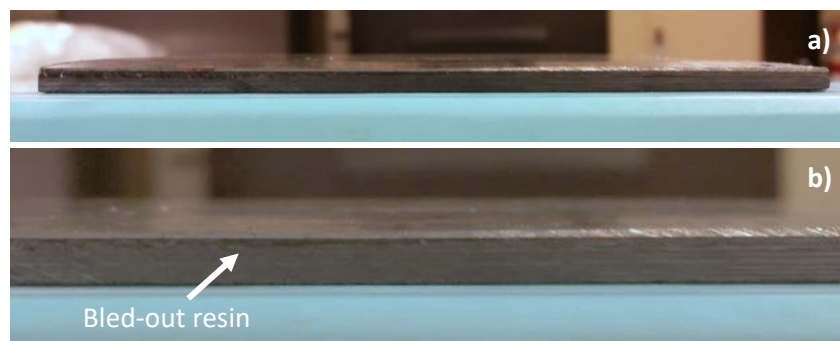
Phase 1: Example of a) cured GRIP Metal™-CFRC assembly made with pre-compression, b) zoomed image of a), showing bled-out resin
